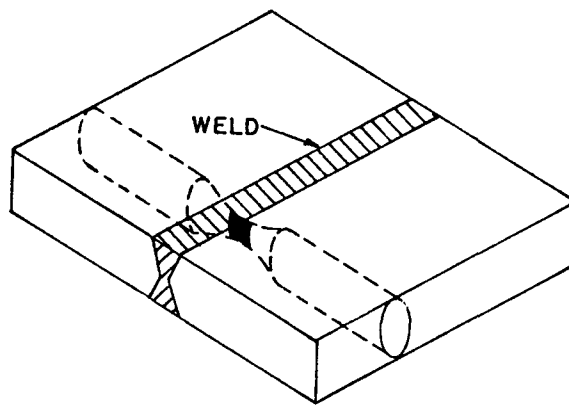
Test Specimen from a Welded Plate, Long. Dir. (Ref. 94)
